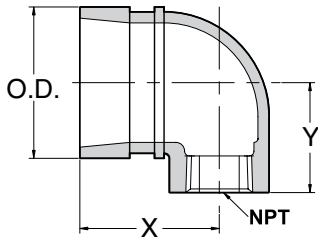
Groove x Thread Reducing 90° Elbow
